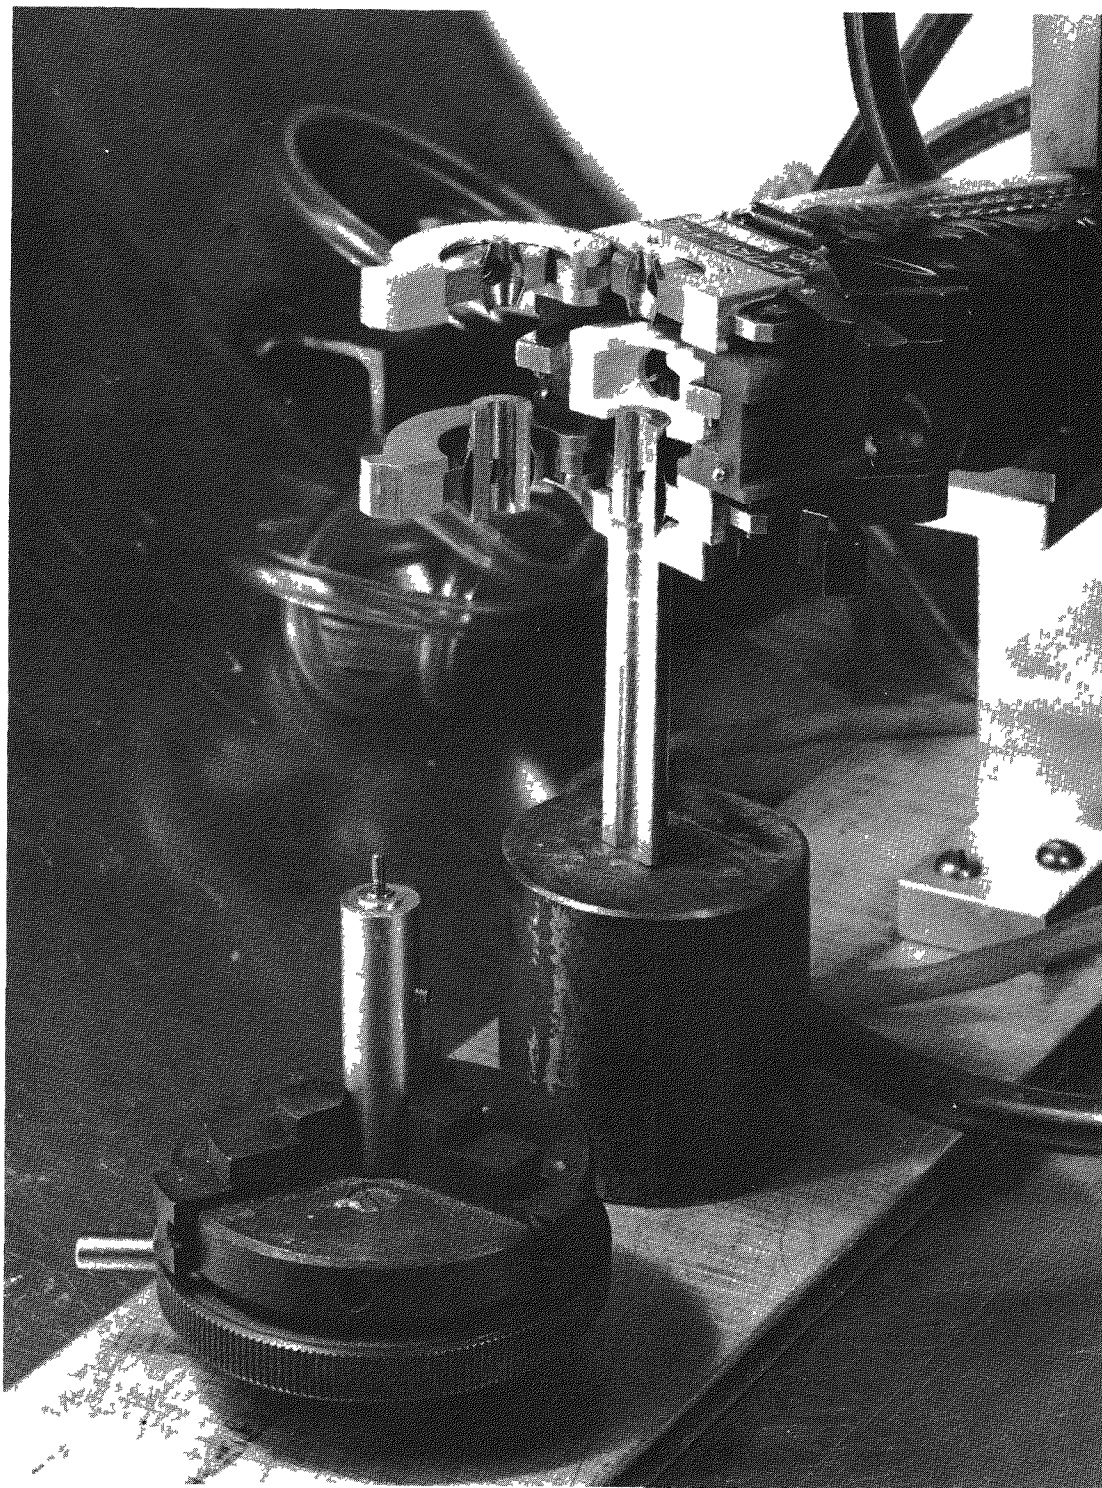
View after Filing Off Expendable Tip to Expose Threaded End of Filler Pin of Element Preassembly. ANL Neg. No 104-77-103.
